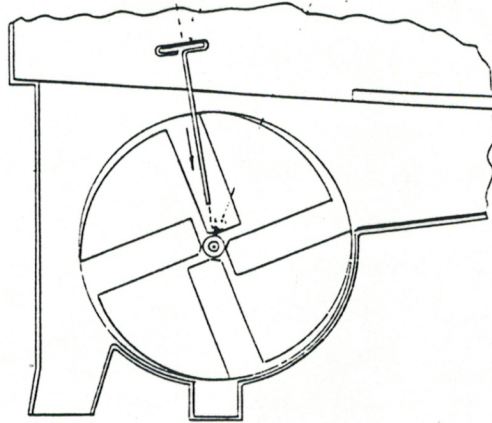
Schematic of set screw adjustment with hex wrench (side view)
